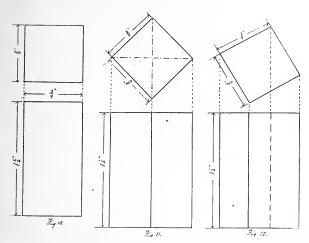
is the working drawing of a square prism, using one of the oblong faces as the front.
